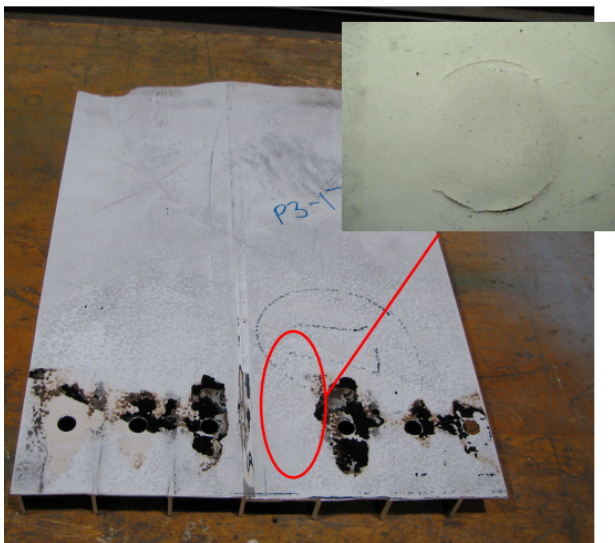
Cracking of protective coatings around fastener head (insert) in a retired military aircraft wing panel
